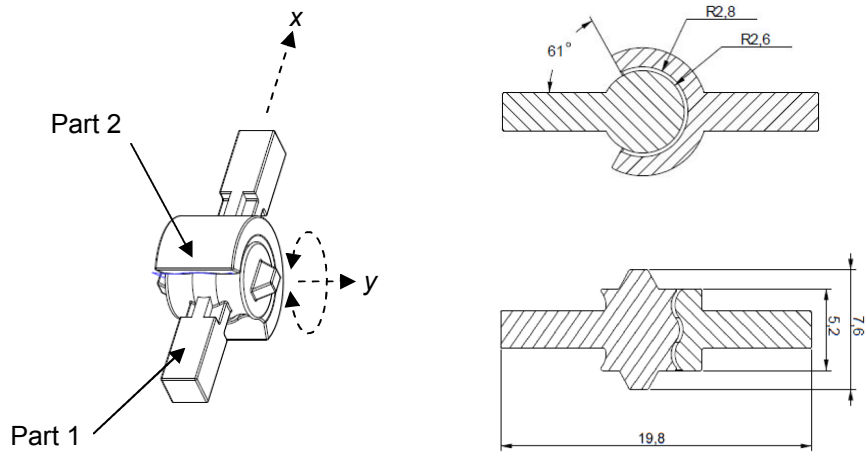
A CAD illustration of the moving joint (all dimensions are in millimetres).
